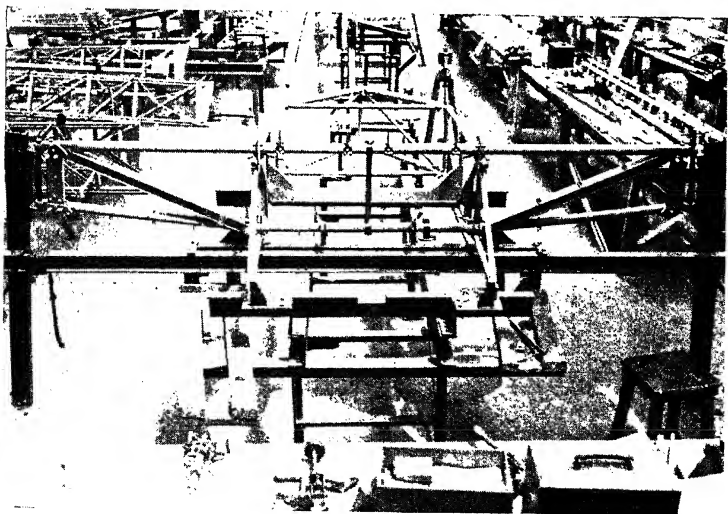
CABIN STRUCTURE TRAY ON JIG WITH CENTRE SECTION WING SPAR IN POSITION.
